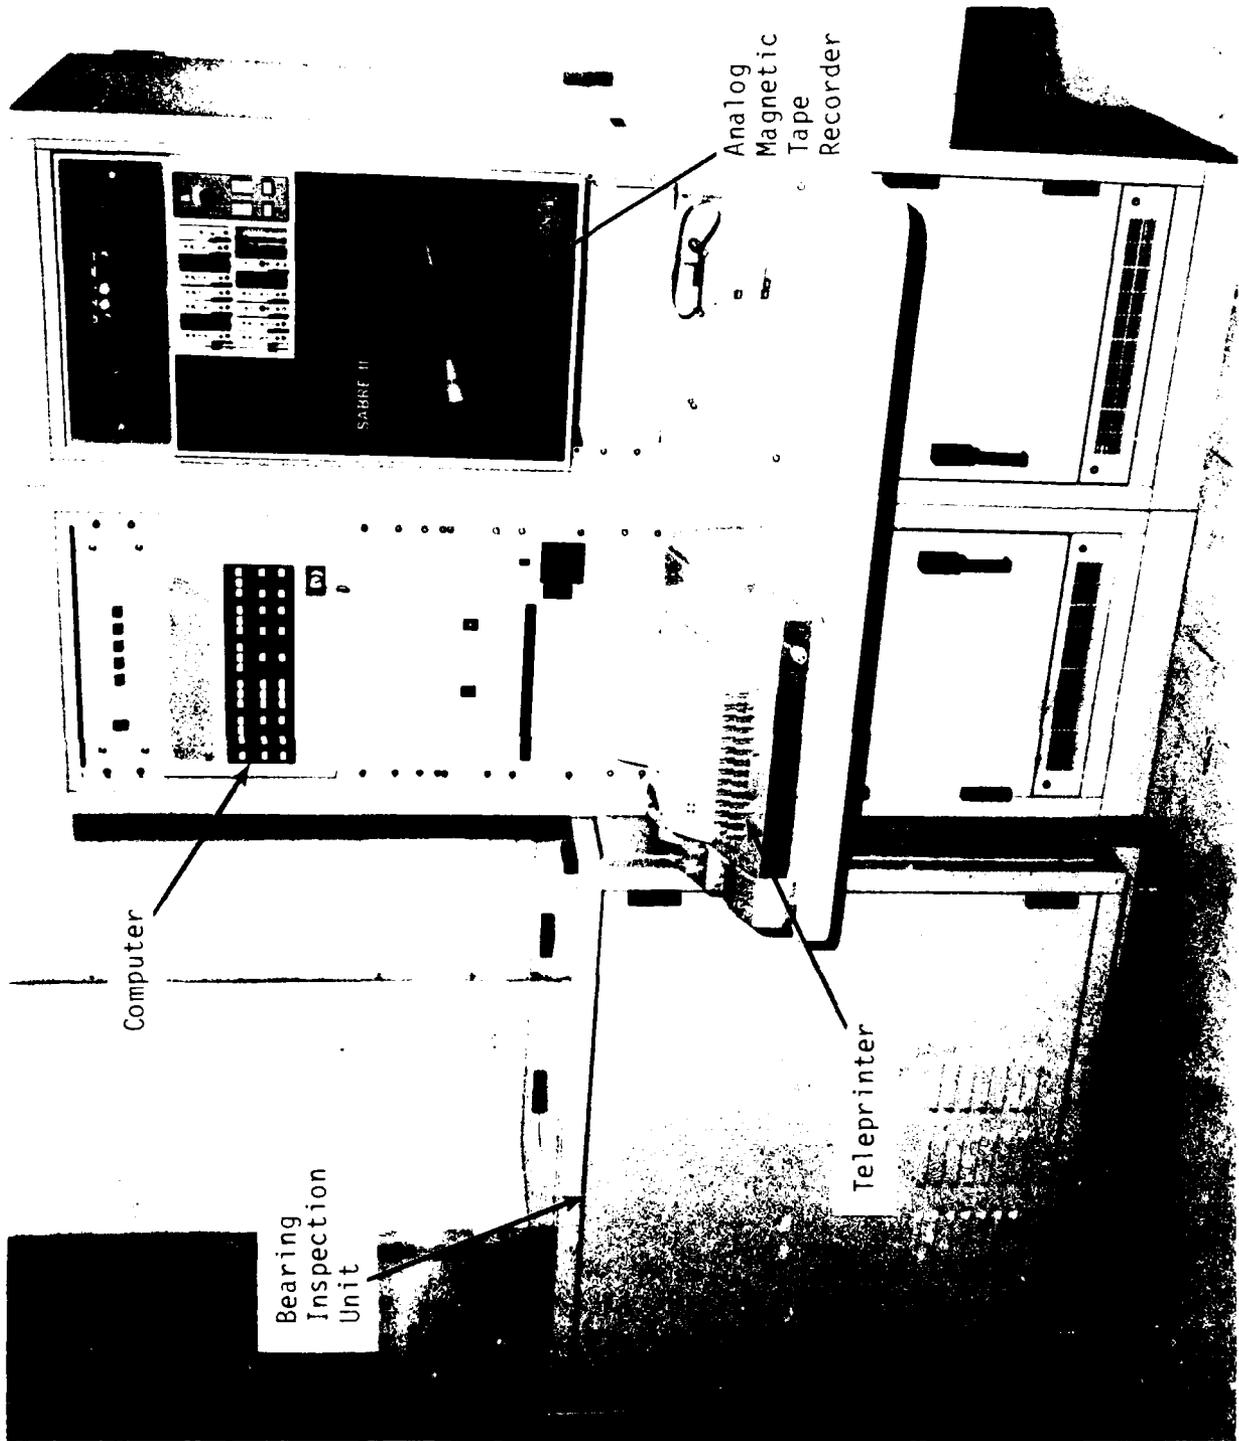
Overall View of SwRI Bearing Inspection System
